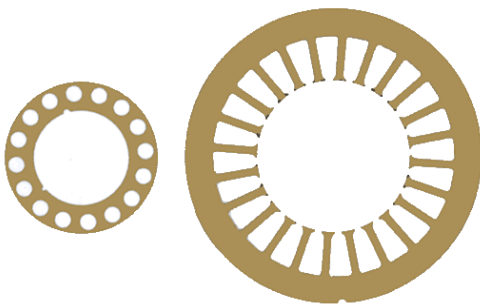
V6 150 mm (6'') Submersible Motor Stator and Rotor Stamping (Courtesy VIRA PUMPS)
